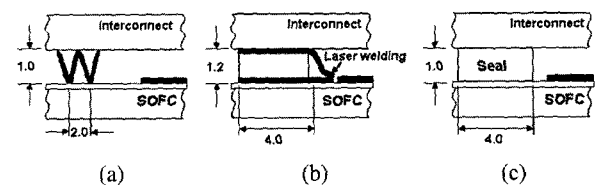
Schematic drawings of different compressive sealing concepts: (a) corrugated metal sheet with filled with mica paste; (b) sandwich arrangement of mica paper and metal sheet; (c) plain mica paper.²¹⁾
